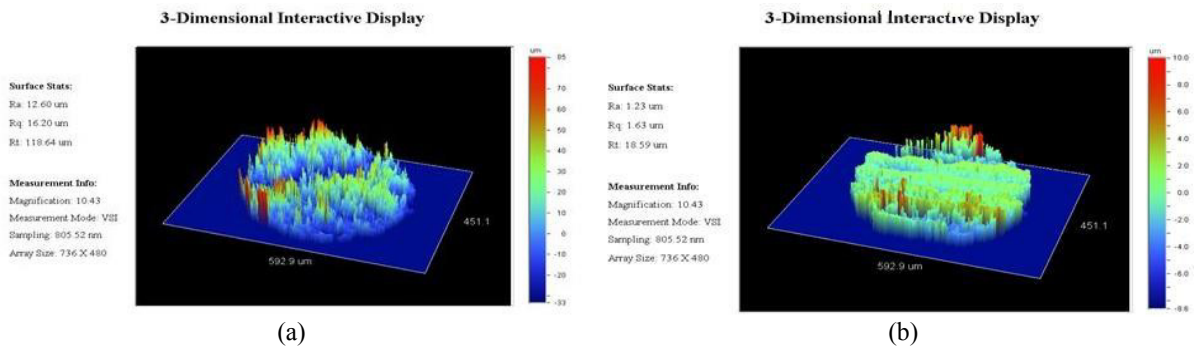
Three dimensional surface plot of gear tooth surface (a) before PECH (b) after PECH [21].
